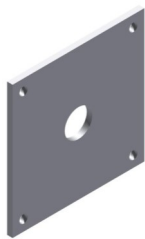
CONCRETE INSERT PLATE FOR ANCHOR BOLT
